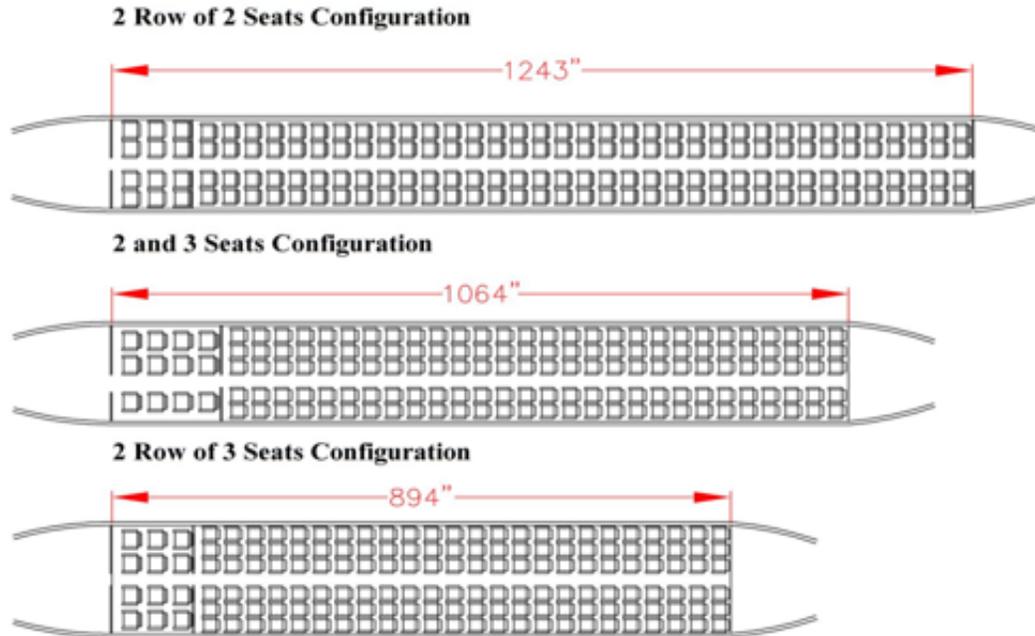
Cylindrical Fuselage and Passenger Seating Configuration Layout Designs
